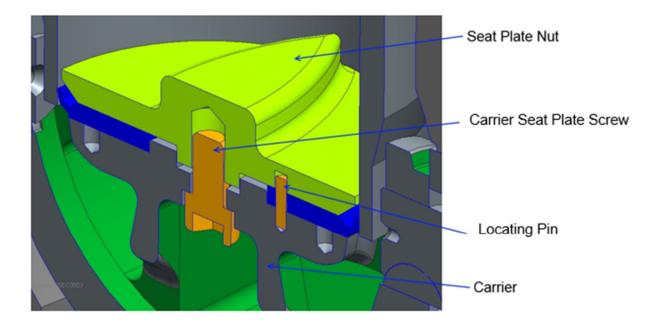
Install the Seat Plate and Seat Plate Nut
